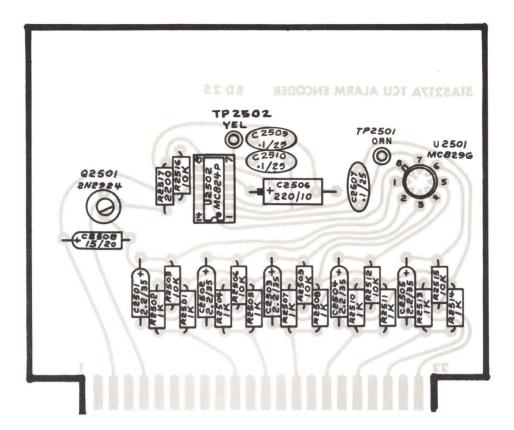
TCU Alarm Encoder (Board 25), Parts Location
